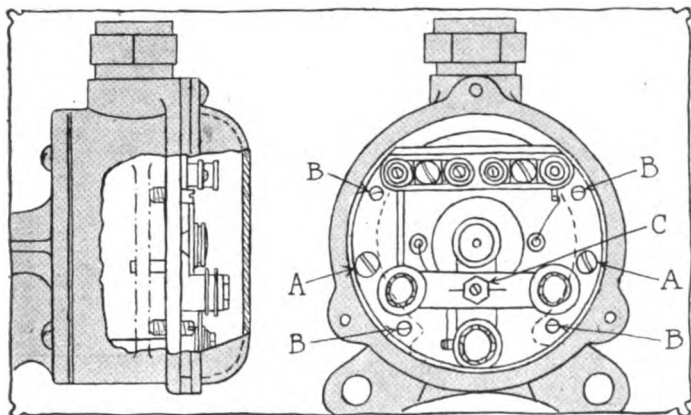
Points of adjustment on Holtzer-Cabot horn
